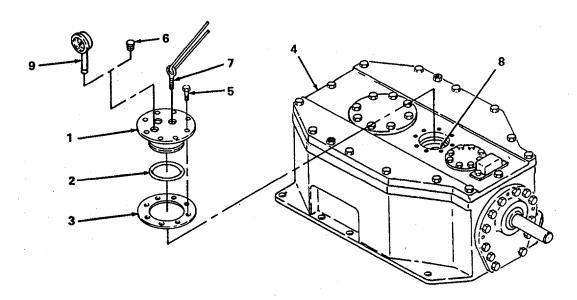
Adjusting Axial Float of Intermediate Shaft.
